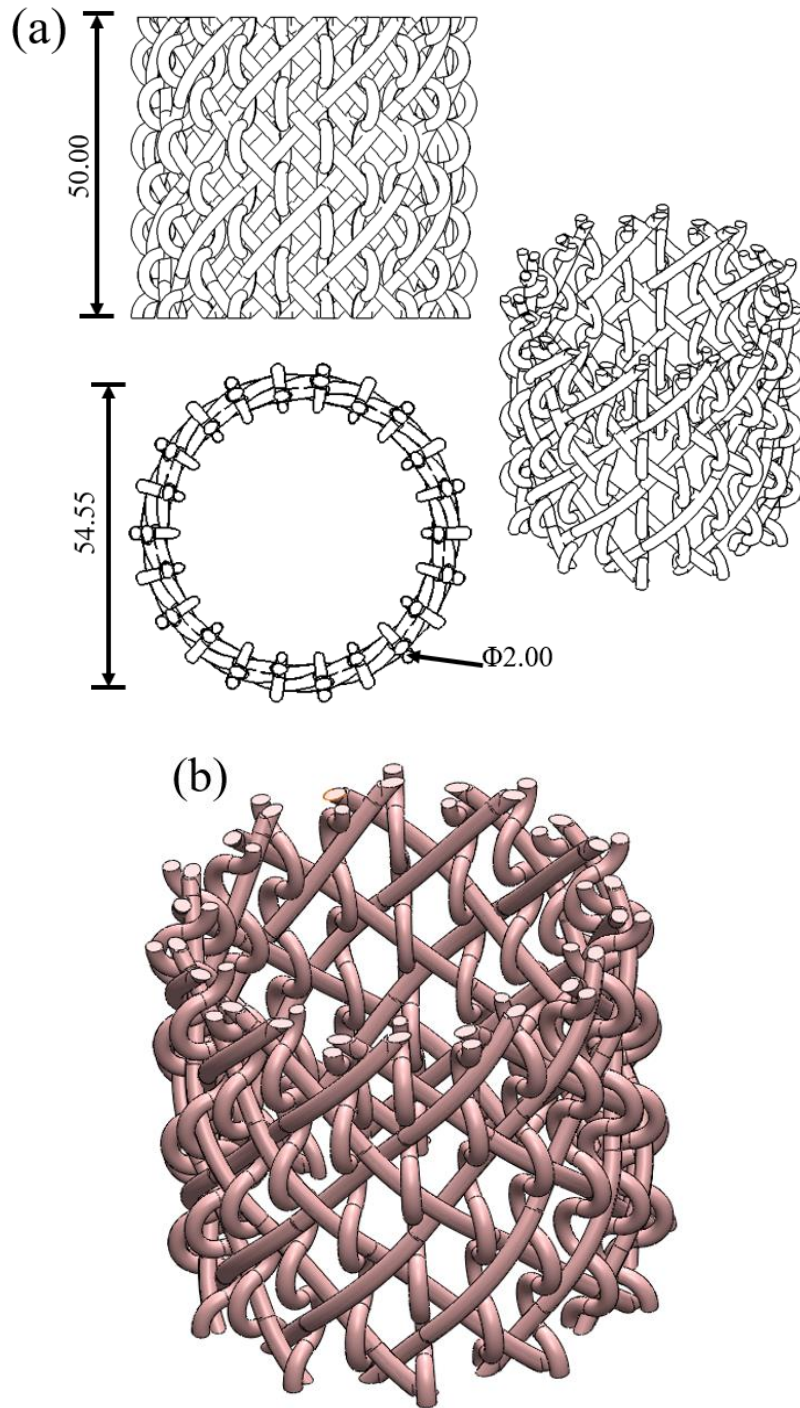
Design and CAD modeling of triaxial braid. (a) Design of braid, and (b) 3D model of braid. The dimensions are given in millimeters (mm).
